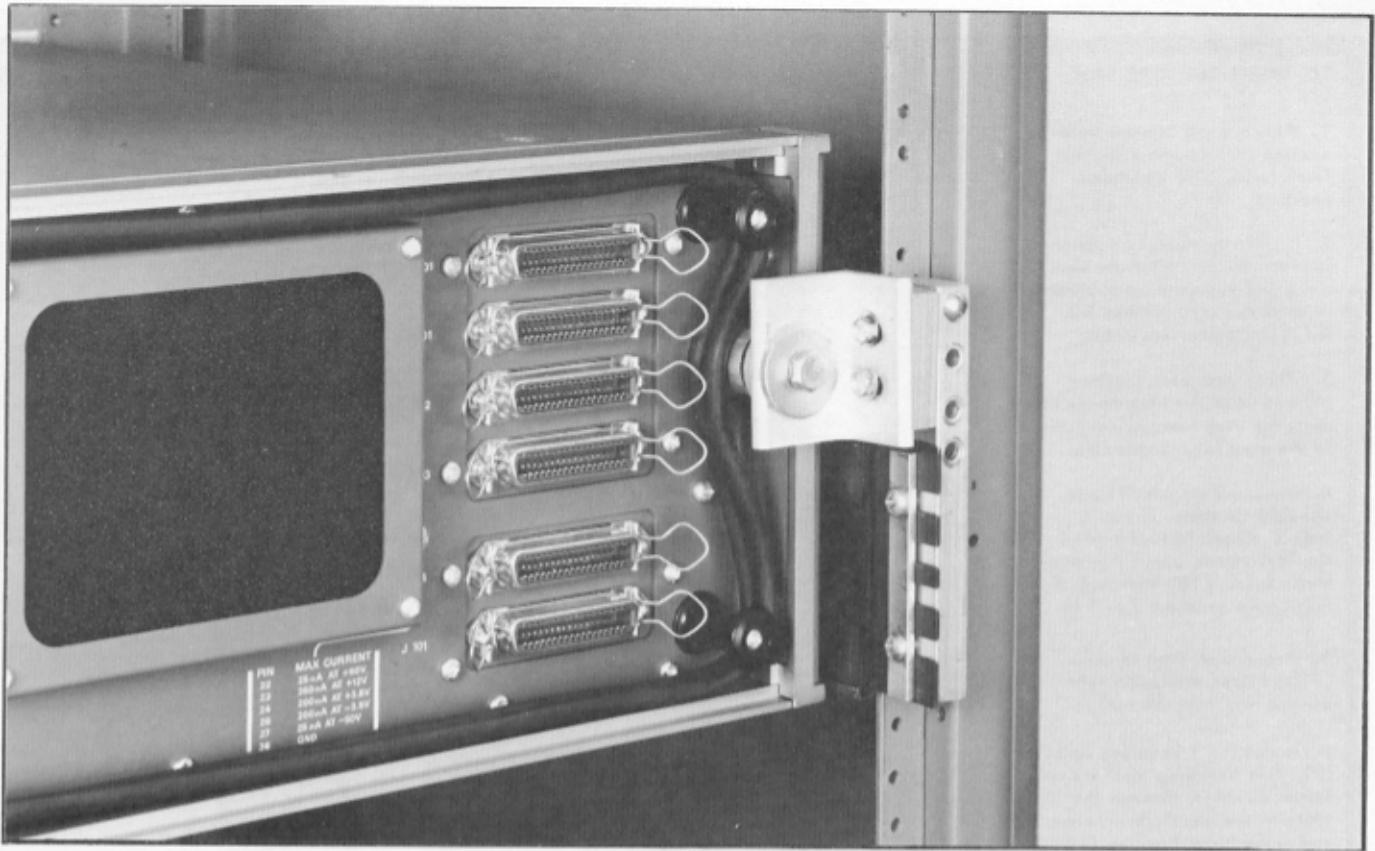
Completed installation of left rear support. Mounting with 22-inch stationary section (Groups A and C) is shown.
